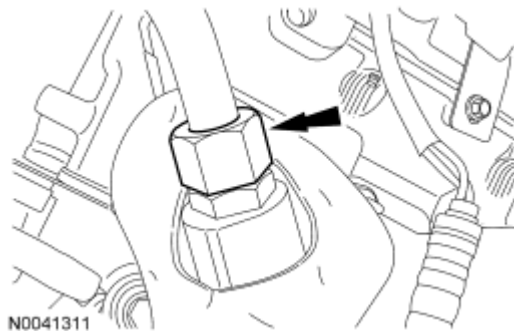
Locating EGR Tube Nut At RH Exhaust Manifold
